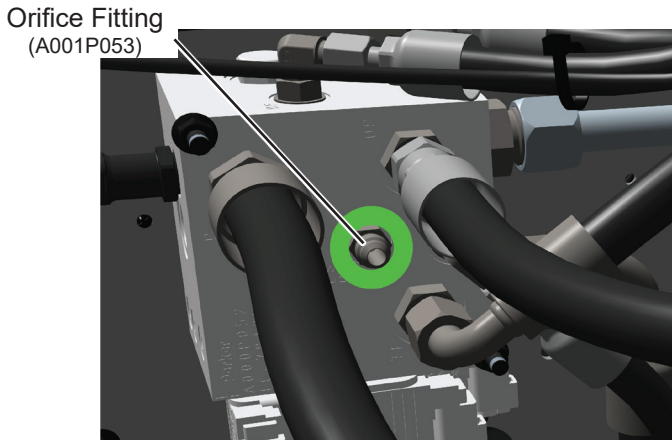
Hydraulic Manifold and Auxiliary Pump Fittings
